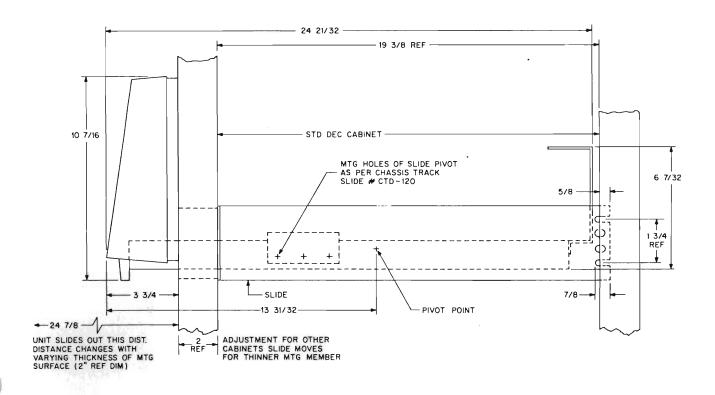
Dimensions, PDP-8/S Mounted in Standard DEC Rack
